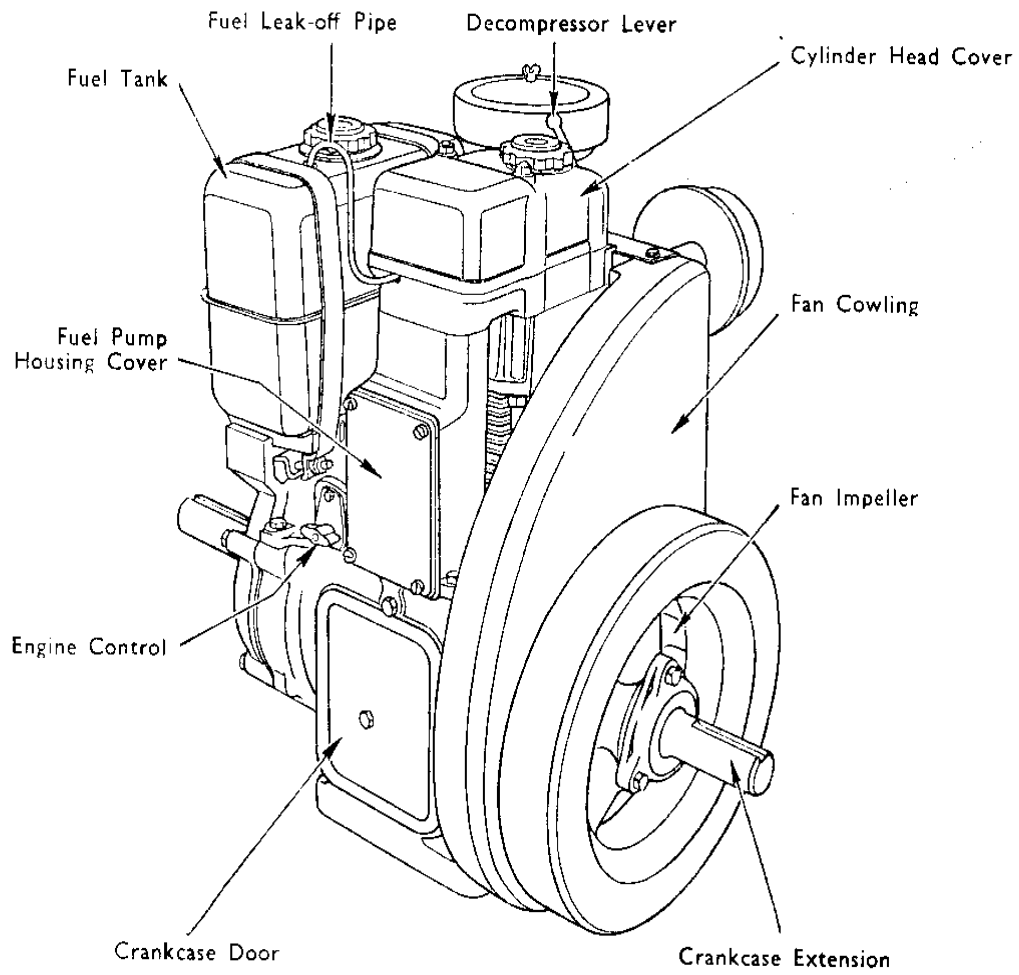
Type LD1 or SL1 Engine—Front View.
